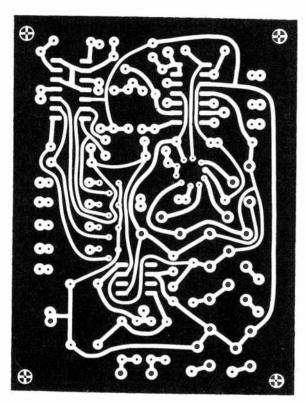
Full-size etching and drilling guide for printed circuit board.
